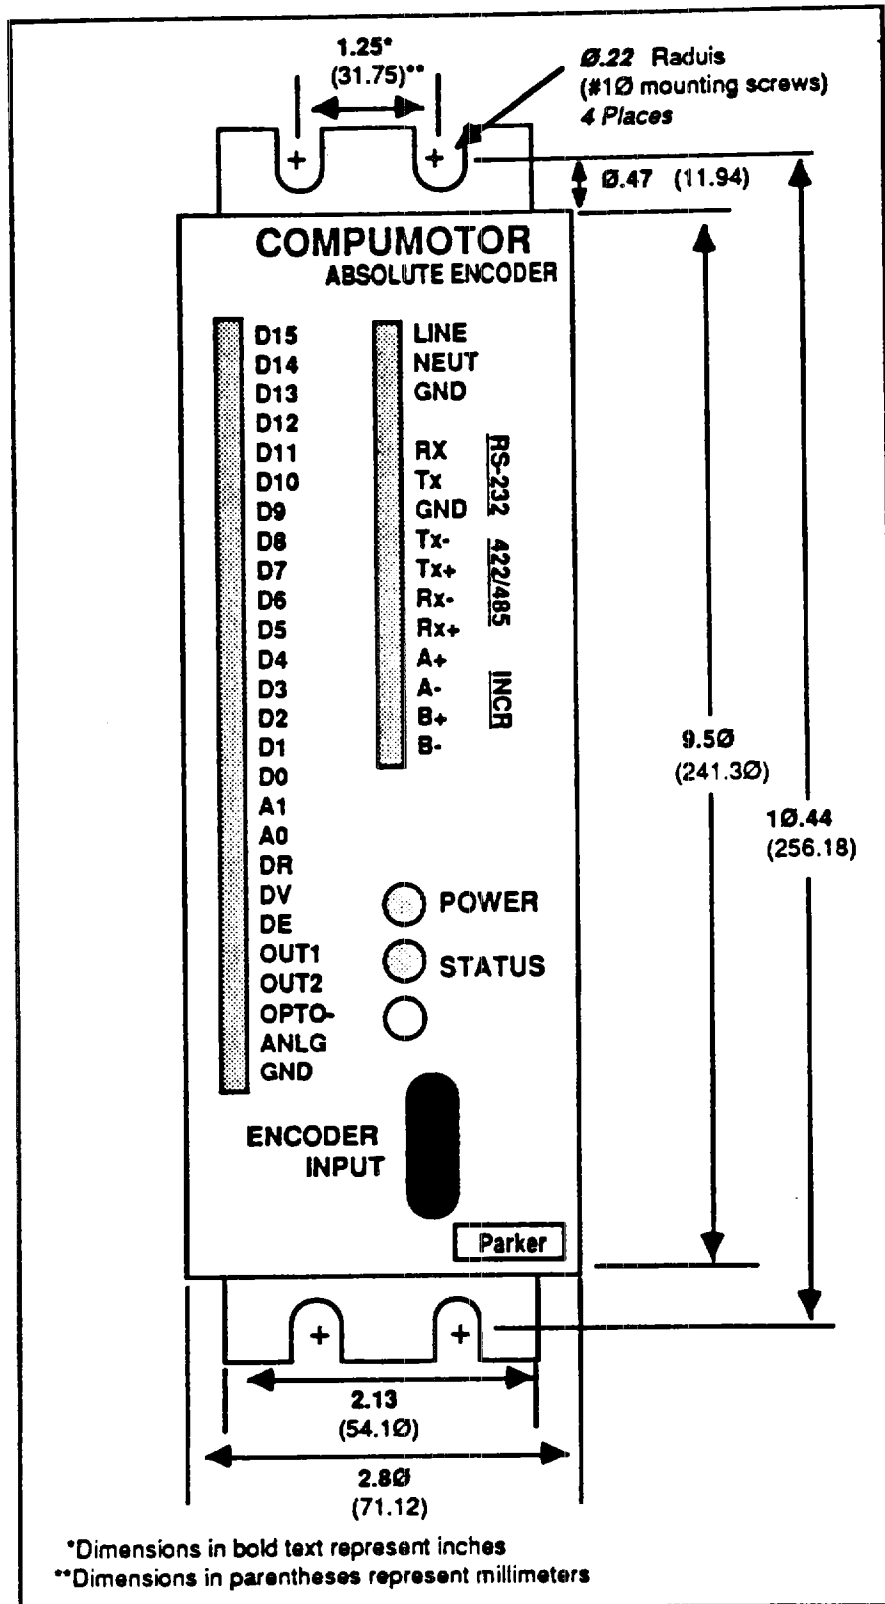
Decoder Box Dimensions (Minimum Width Mounting)
